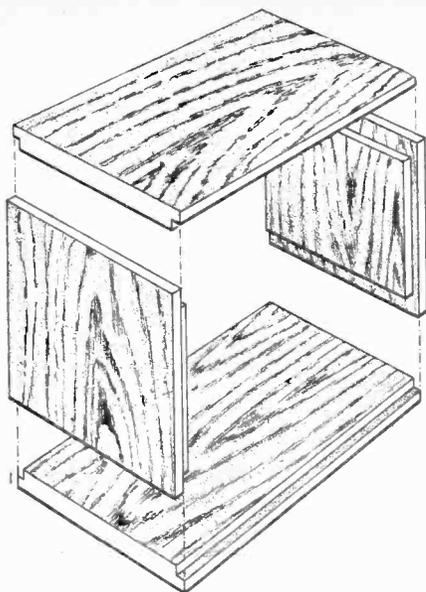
Sides, top and bottom of case having inserted front and back panels.
